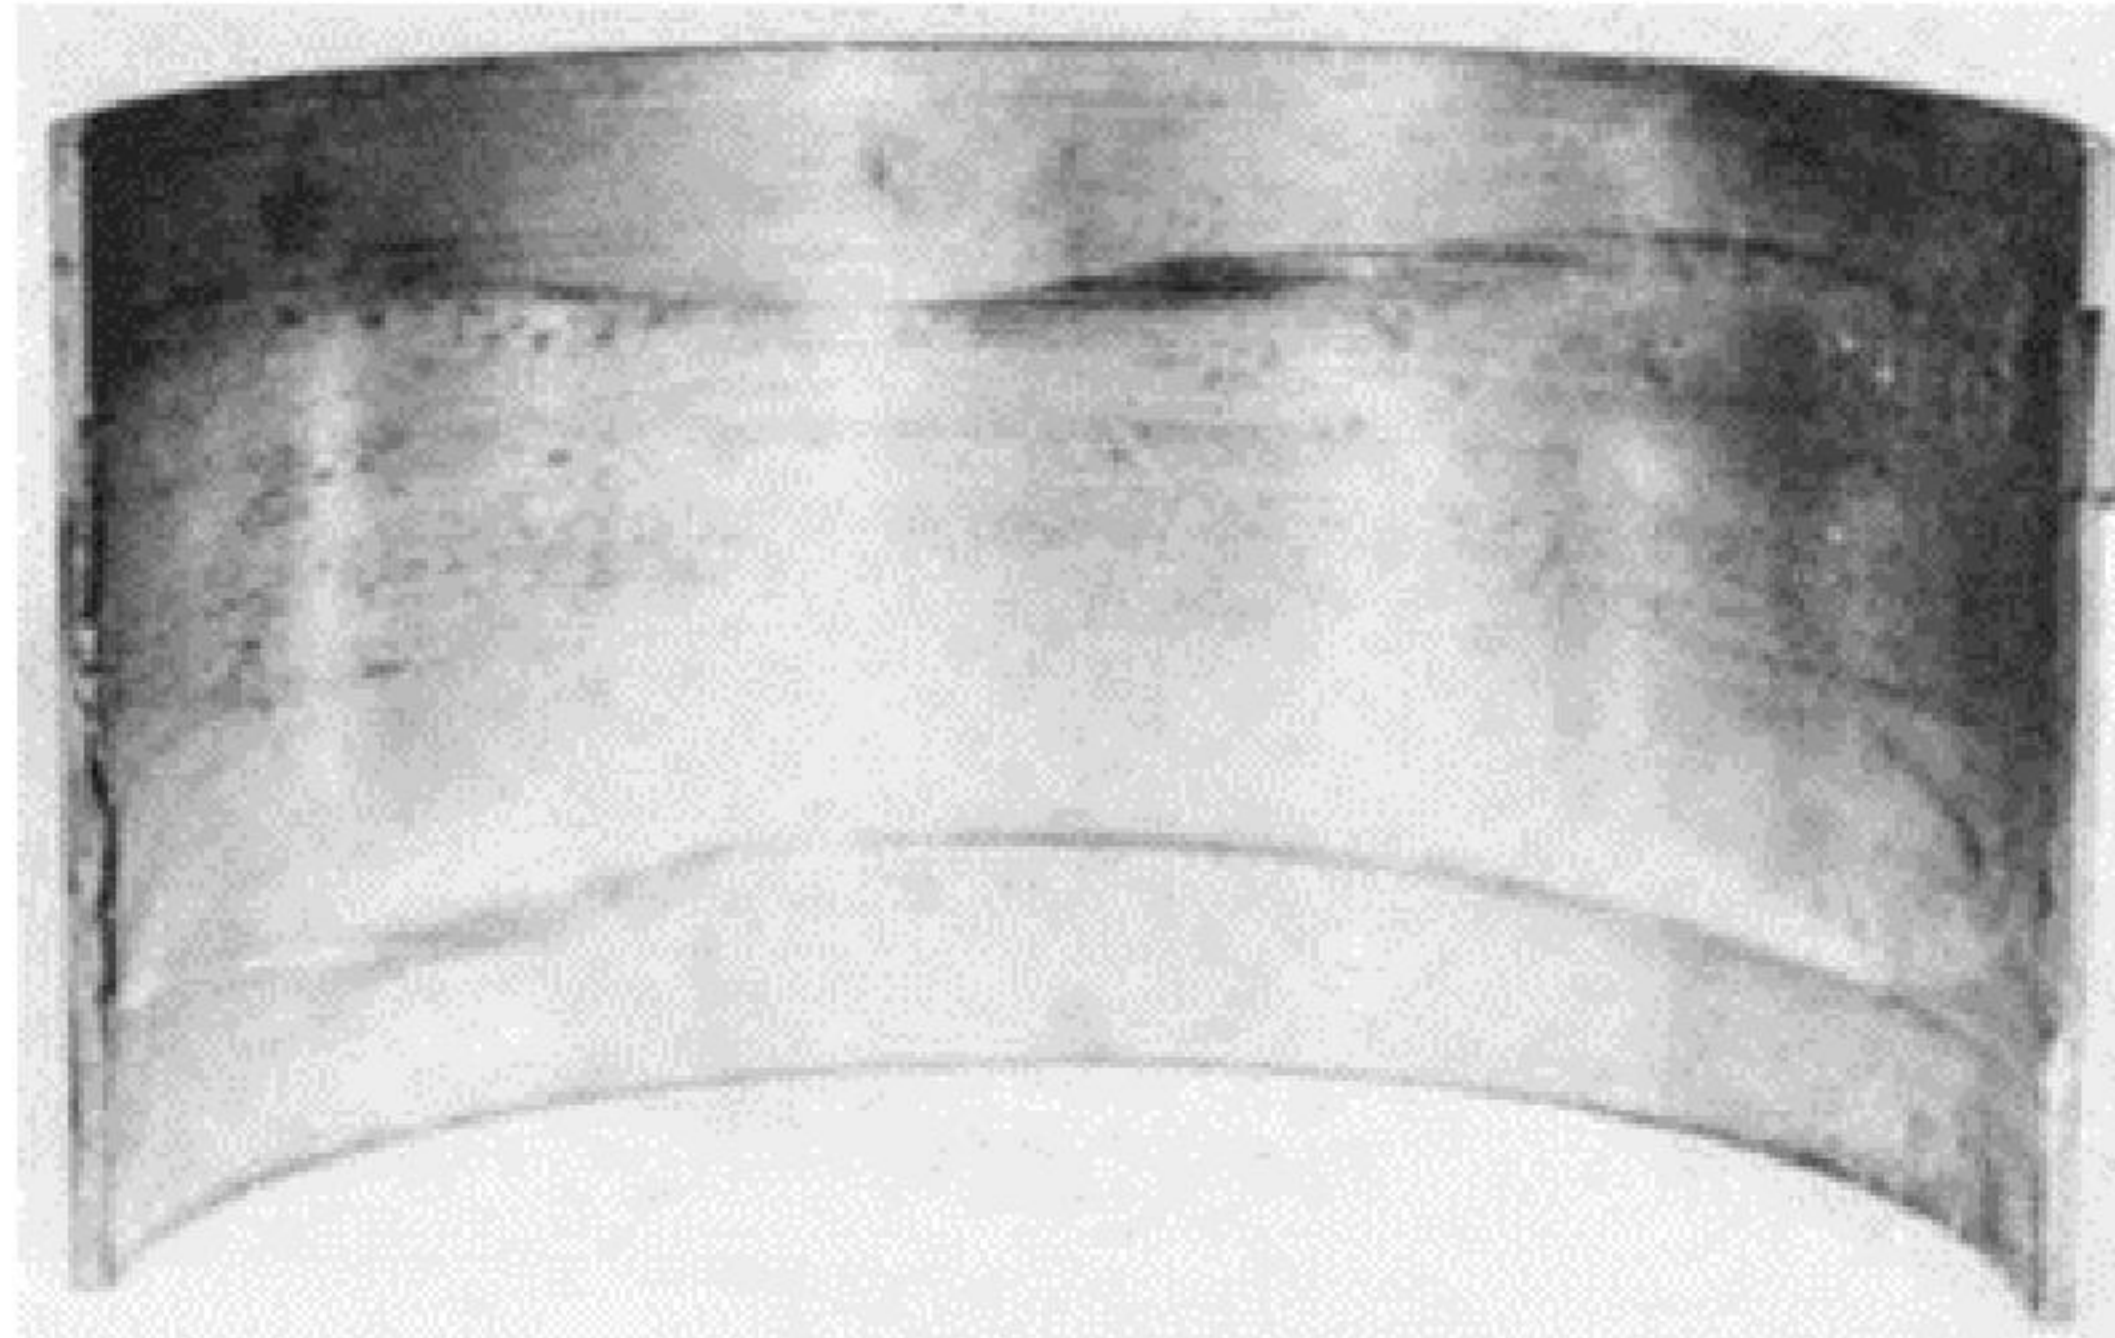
Bearing worn in the center by a barrel-shaped shaft.
